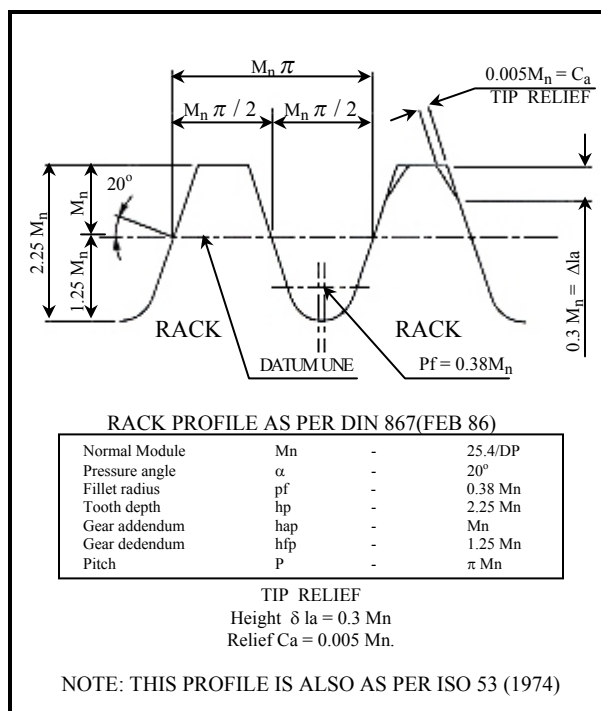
3 The manufacturer specified tip relief of the nylon gears.
